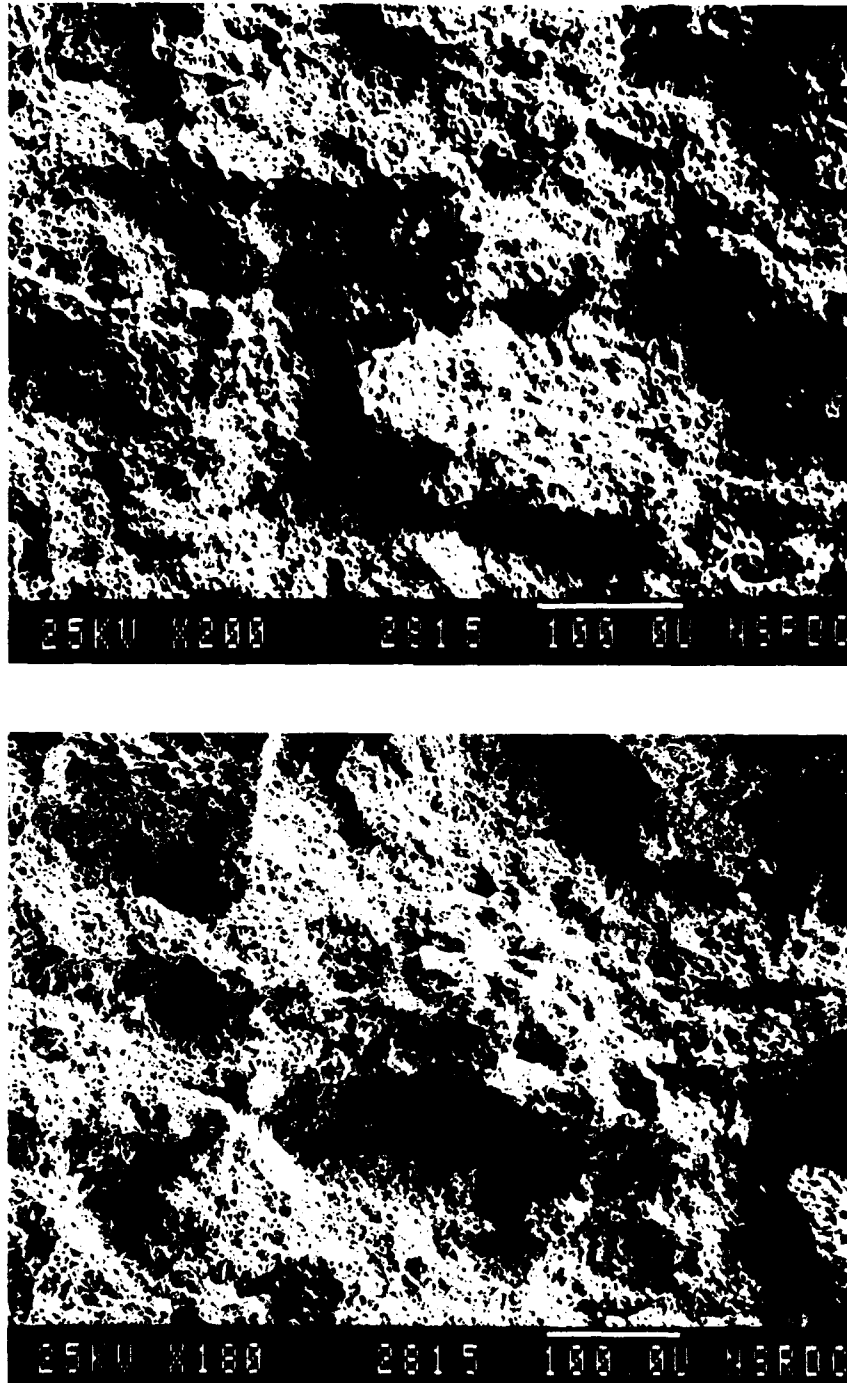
High magnification scanning electron fractograph of CVN fracture surfaces within the upper shelf region (Top-Specimen A28-41; Bottom-Specimen B44-9).
